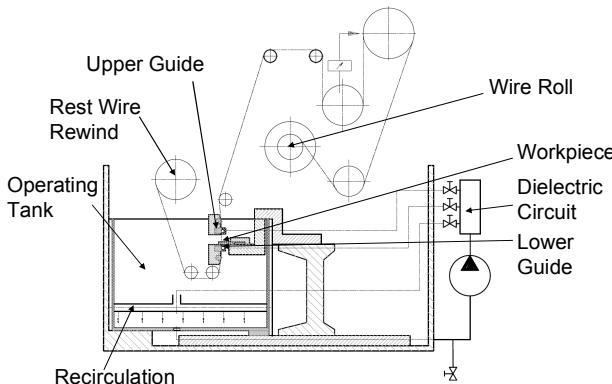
Schematic drawing of the device for powder suspension in Wire-EDM.
